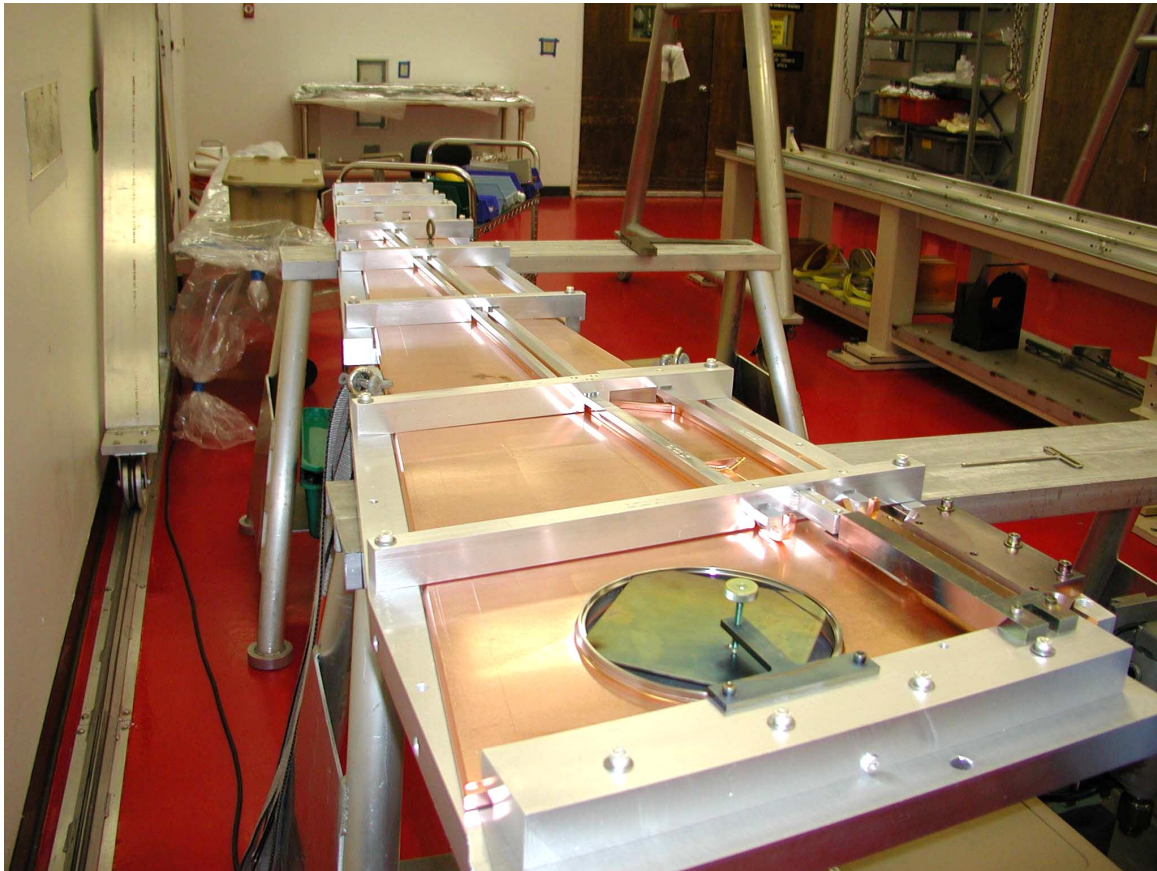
BM-1 Cooling Bar Weld Set-Up
